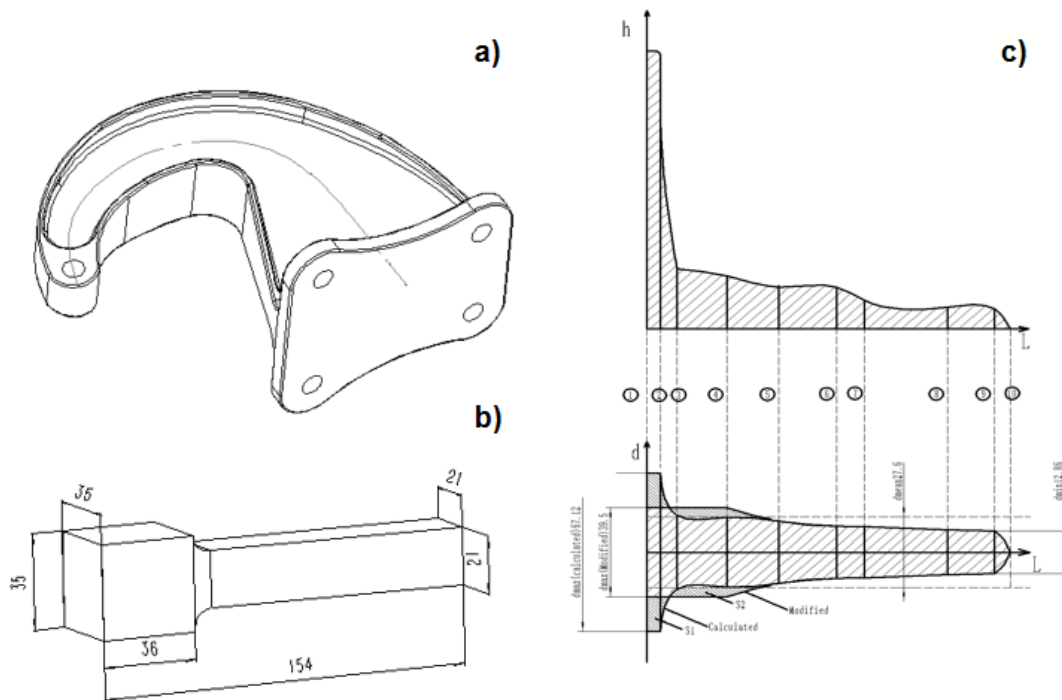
Forging analysis diagram (a - aircraft bracket b - ideal workpiece size after drawing c - cross-sectional and diameter profiles).
